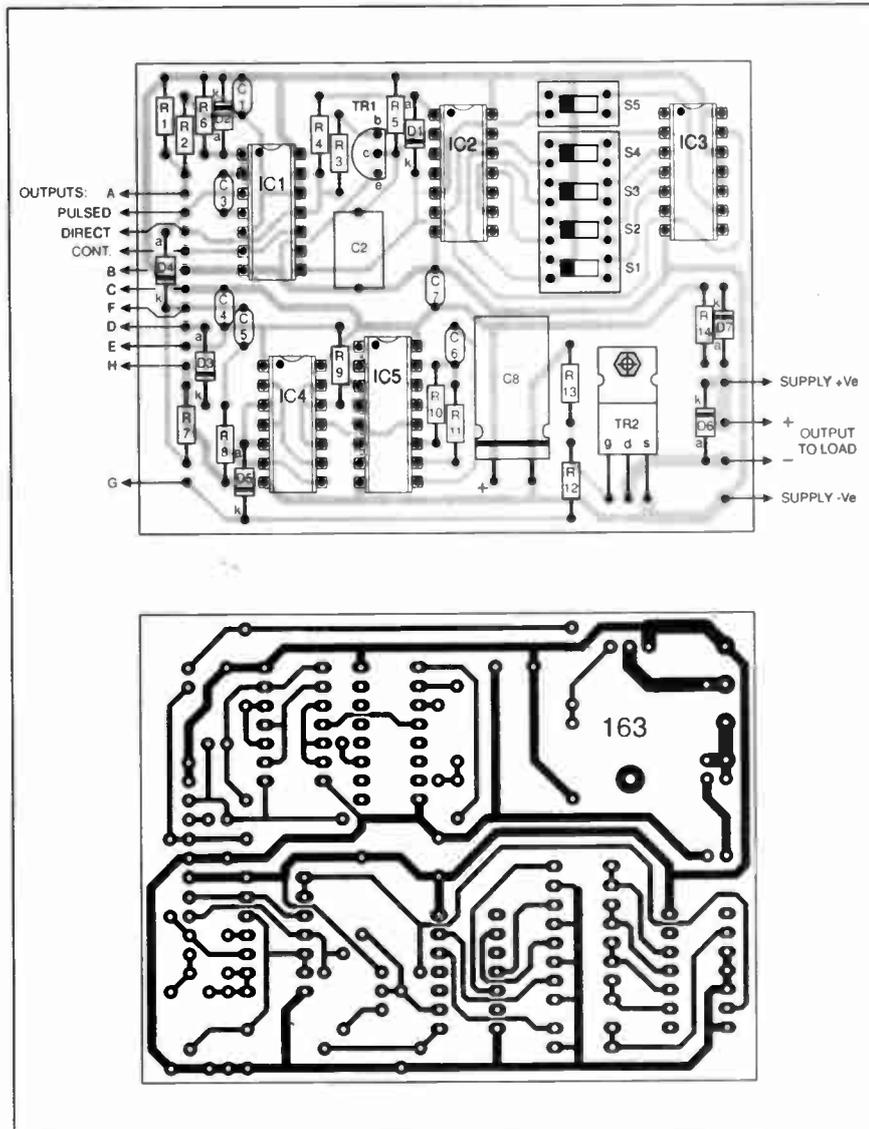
Printed circuit board component layout and full size copper foil track master pattern for the μ Power PIR controller.
